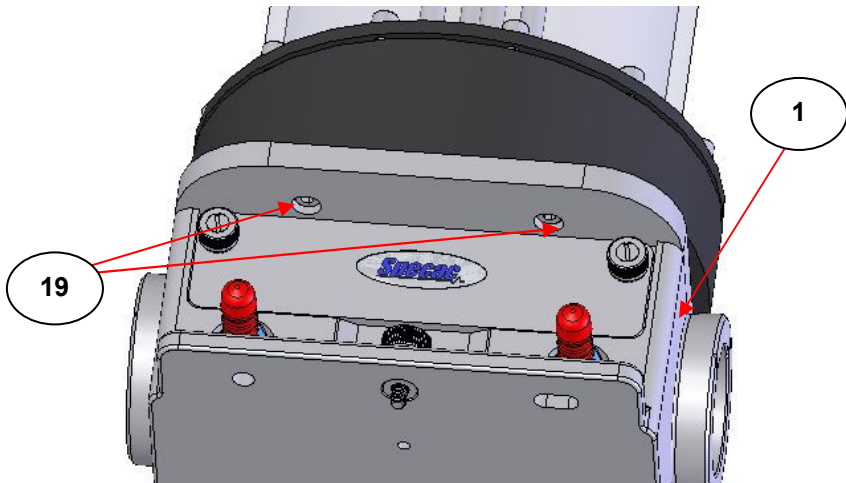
Front View of Tornado™ T10 and T20 Gas Cells Showing Fixing Screws (19) to the Optical Unit (1)
